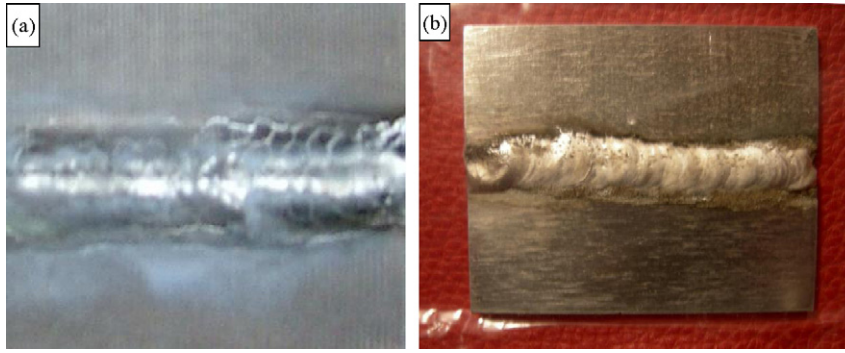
Appearance of TIG weld joint with Al-Si filler: (a) Ar gas and (b) Ar-He mixed gas.
